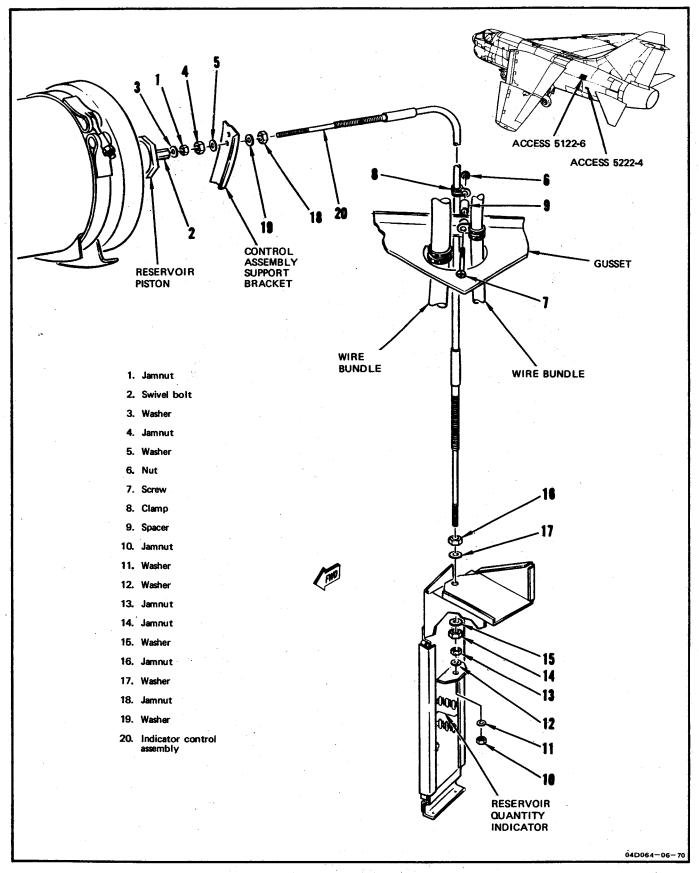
Reservoir Indicator Control Assembly Removal and Installation
